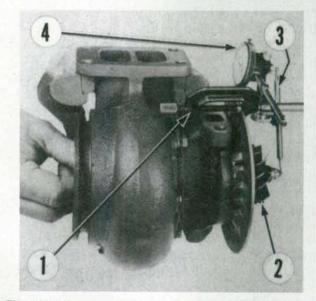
Position dial indicator plunger (3) against end of compressor wheel (2) to check shaft-to-thrust bearing axial clearance. Refer to text for specifications.
